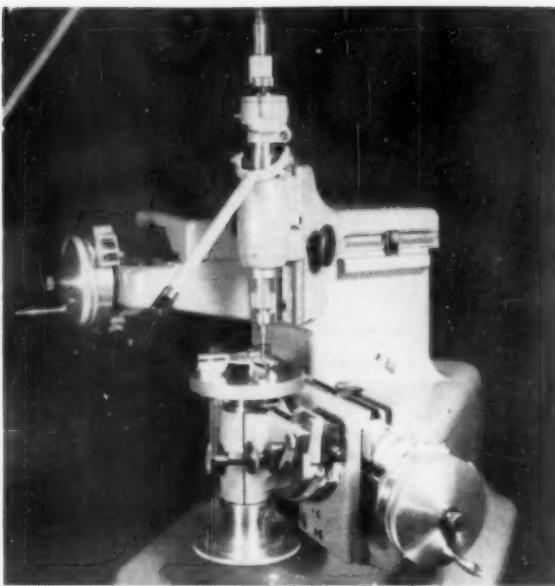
Coordinate measuring machine used as jig borer. Interchange of microscope and drill spindle cases location.
